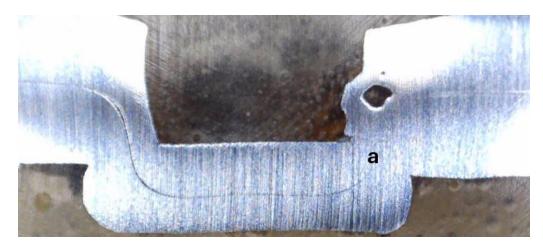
Cross-section of resistance spot welding after clinching.
